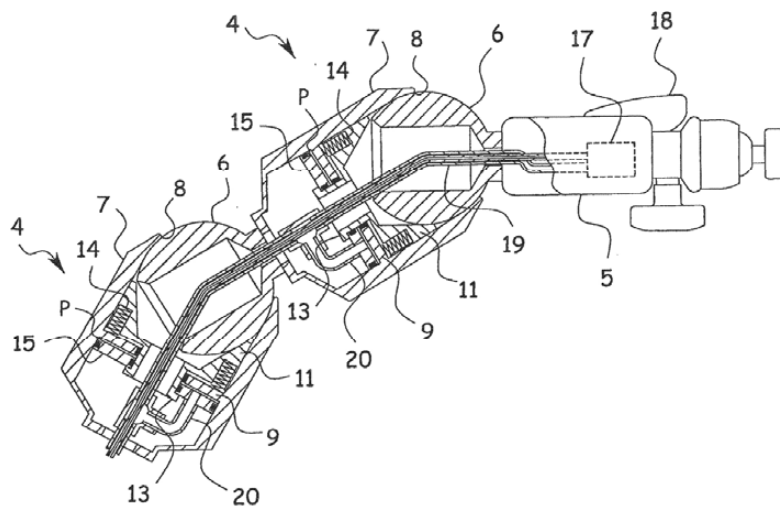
Tool holding articulated arm with frictional locking using air cylinder [86].
